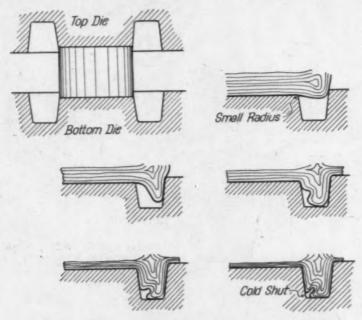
Demonstration of Formation of a Cold Shut Due to Insufficient Radii in Forging Die.
